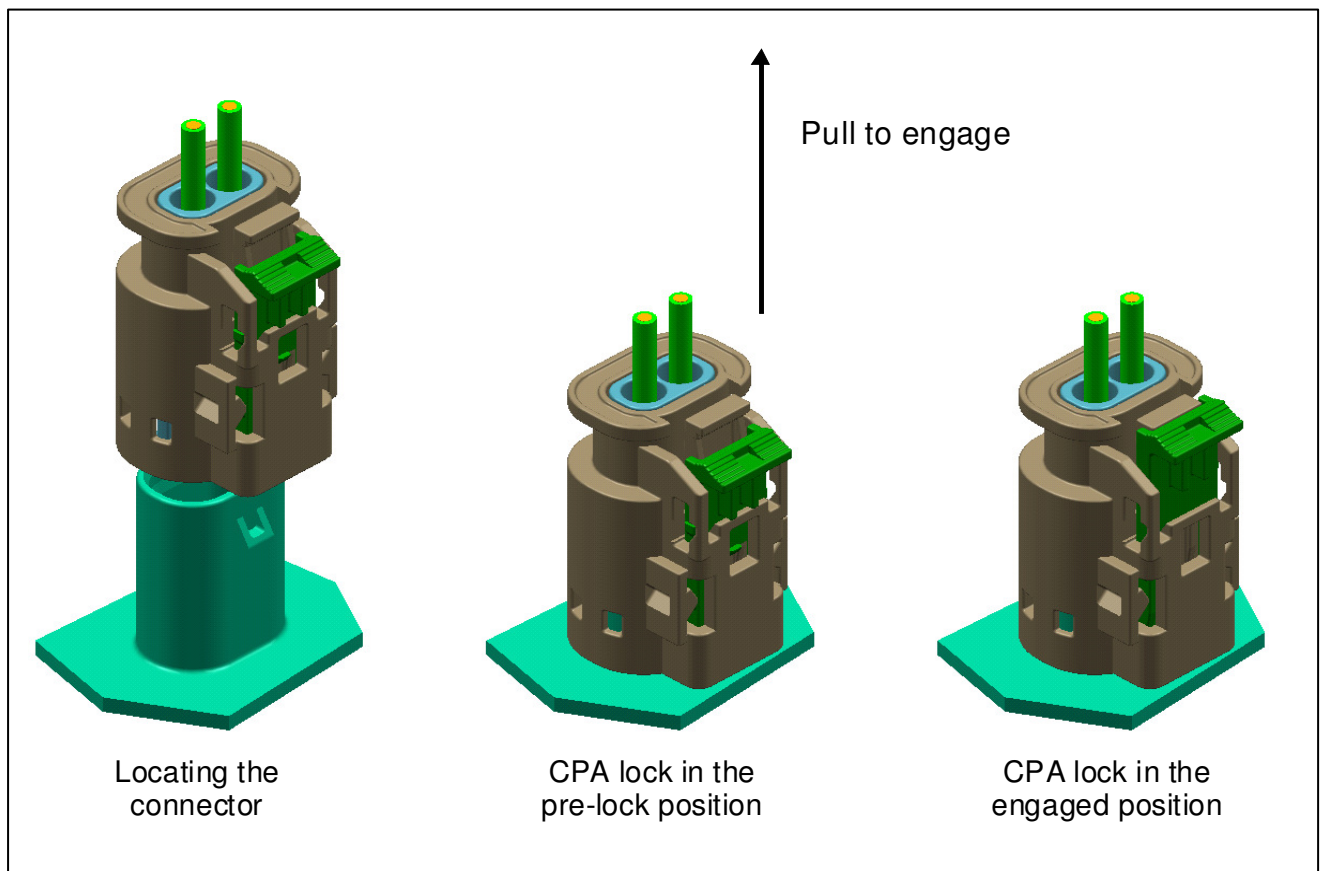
Engaging the CPA latch (pull-out version)
